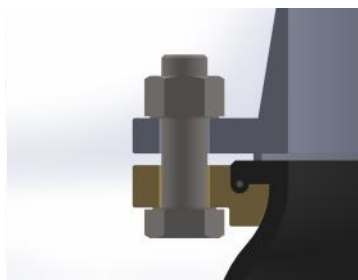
Do not use flange with tongue or groove which will damage the rubber.
